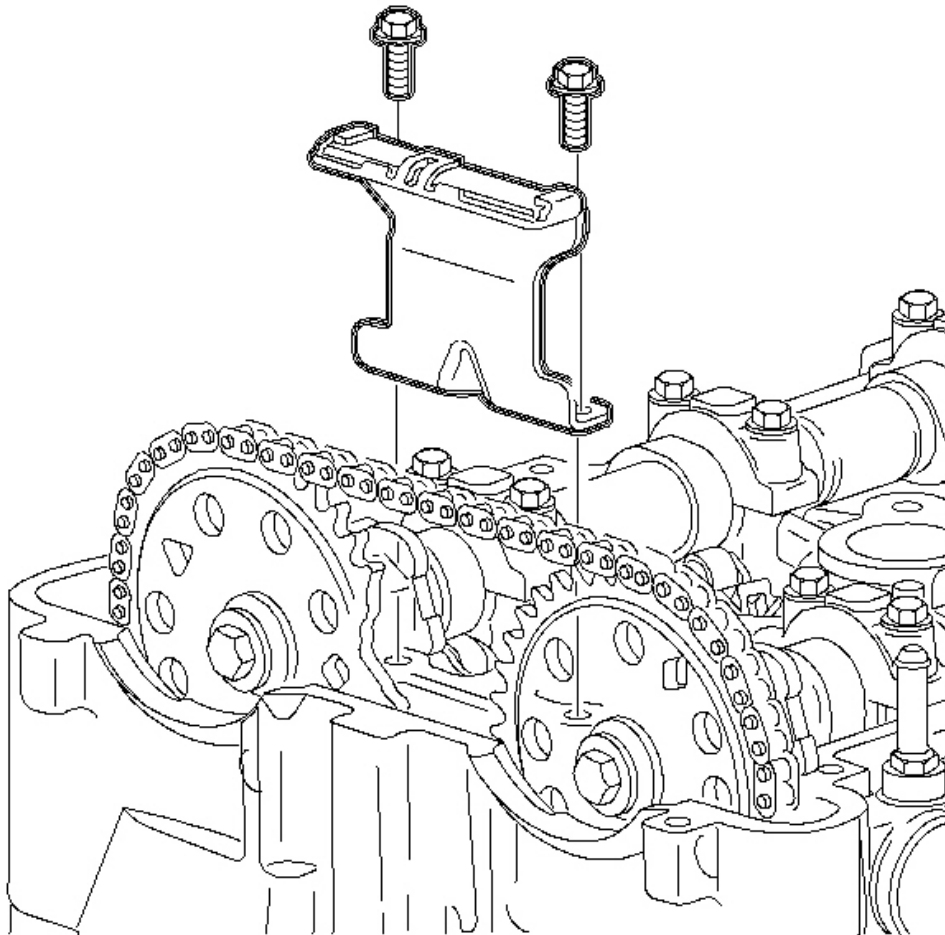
Removing/Installing Upper Timing Chain Guide & Bolts
